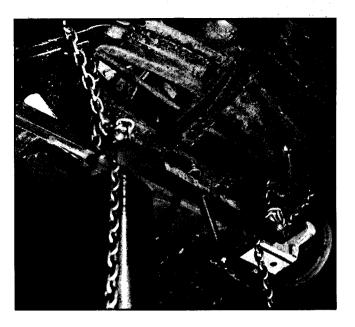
Engine Lifting Tools Installed - V-8 X Series
